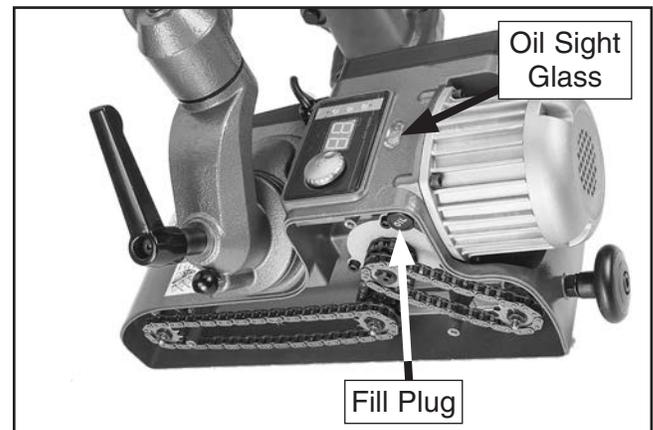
Location of gearbox fill plug/oil drain and sight glass.
